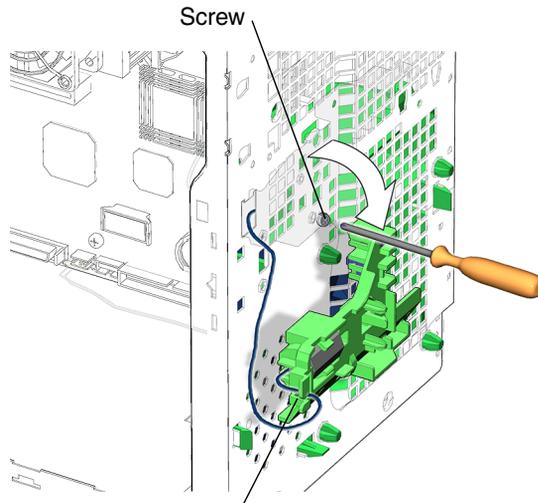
Loosening the Power Switch and LED Cable Assembly From the Chassis
